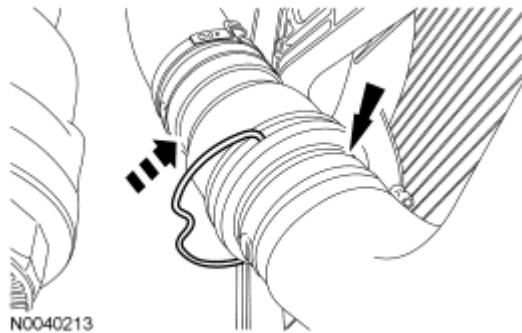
Identifying Lower Radiator Hose And Installing Retaining Clip
